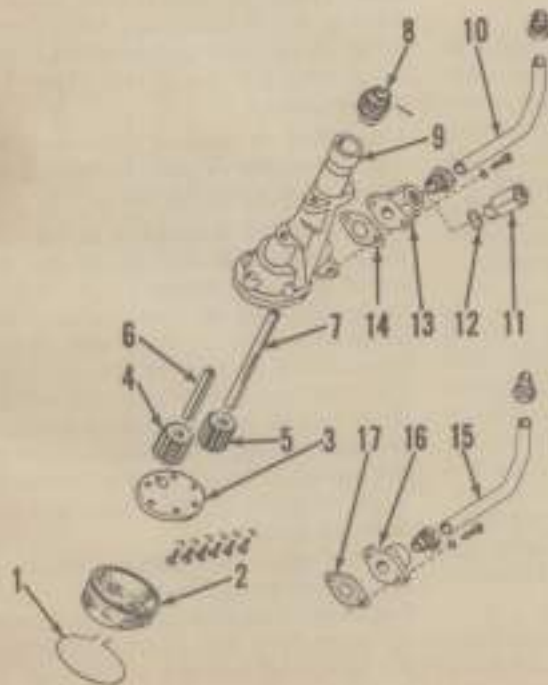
Exploded view of D-17 diesel engine oil pump. Oil tube with relief valve assembly (items 10 through 14) are used after engine serial No. 108899 and may be installed in earlier production units instead of items 15 and 16 to prevent surge pressures due to cold oil from blowing oil filter gasket.
